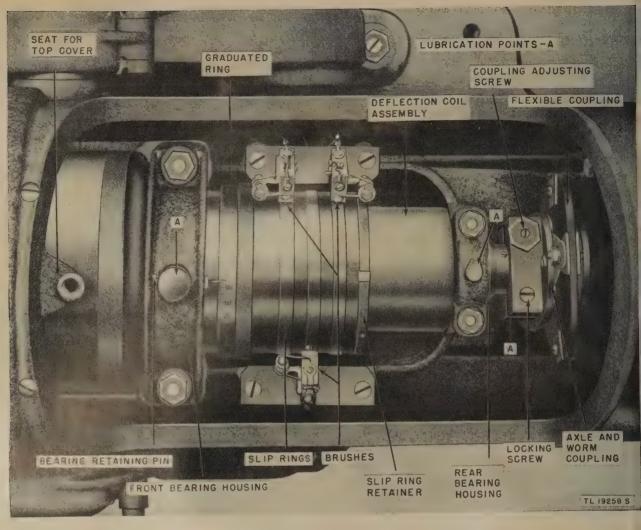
Bearing Indicator BC-1159-A, deflection coil assembly.
